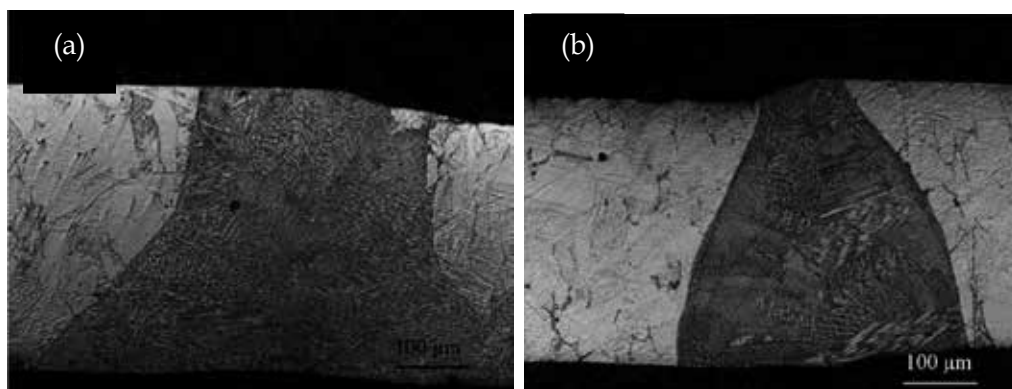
Macrographs of (a) GTA weld and (b) laser beam weld; FeMnSiCr alloy (Dong et al, 2006).
